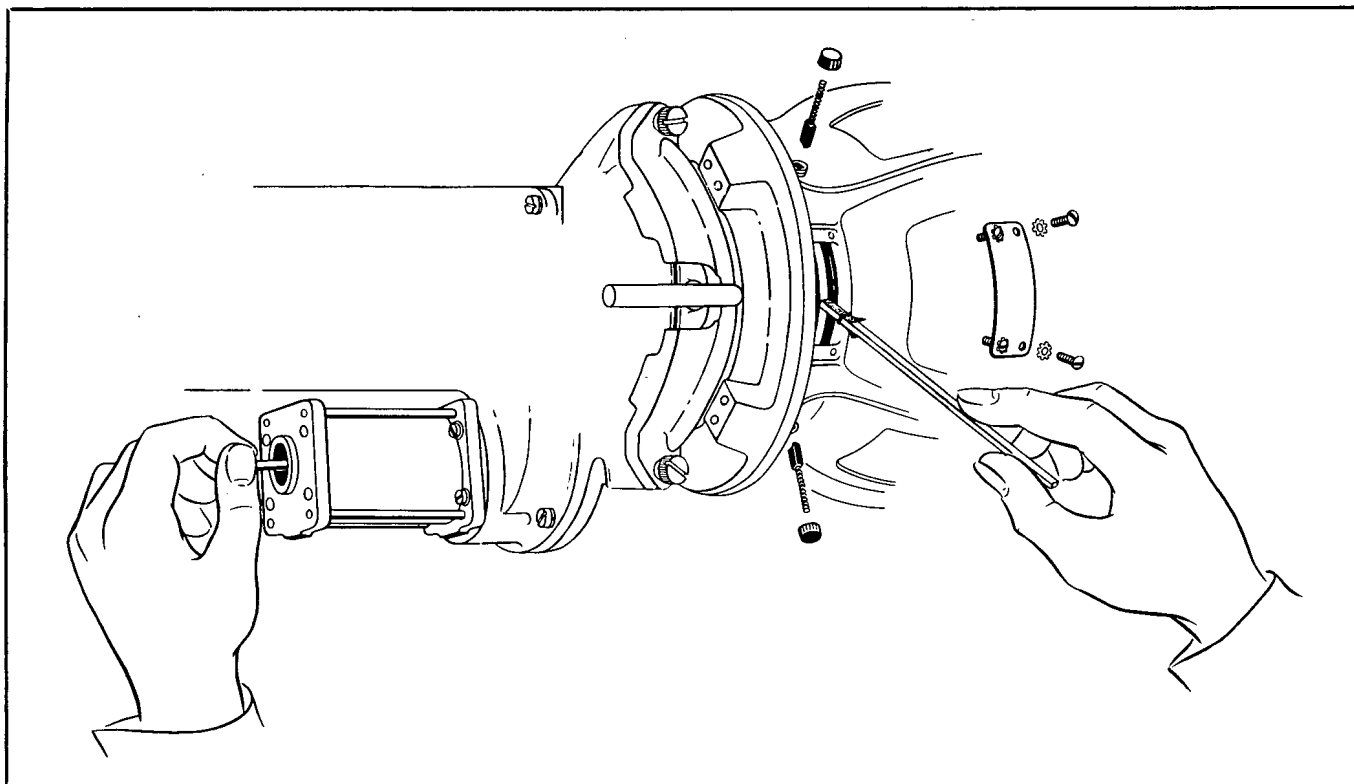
Brushes and Slip Rings on PPI Assembly
